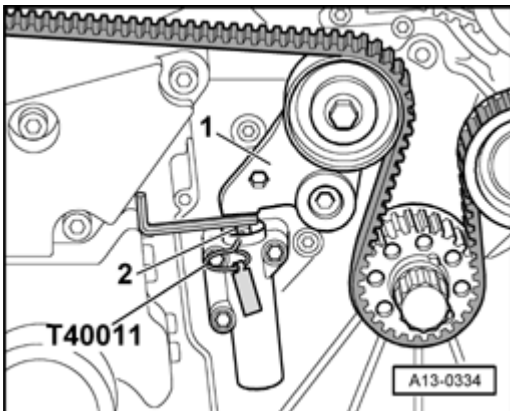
Inserting Hex Socket Wrench Flat Between Tensioning Lever And Piston Of Tensioner
